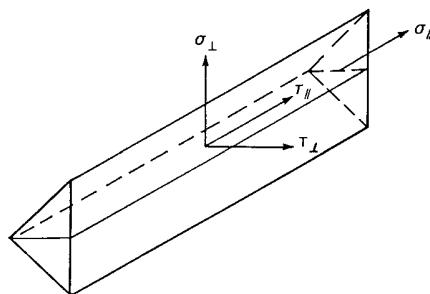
Stresses on the throat section of a fillet weld
